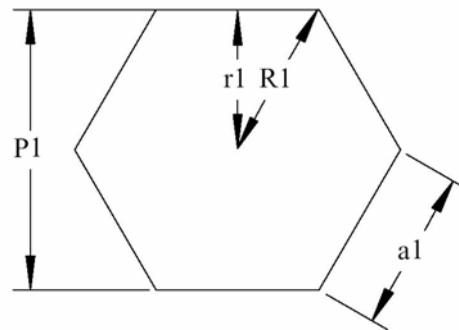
Hexagonal ductless fuel assembly profile of the STAR-H2 concept.
